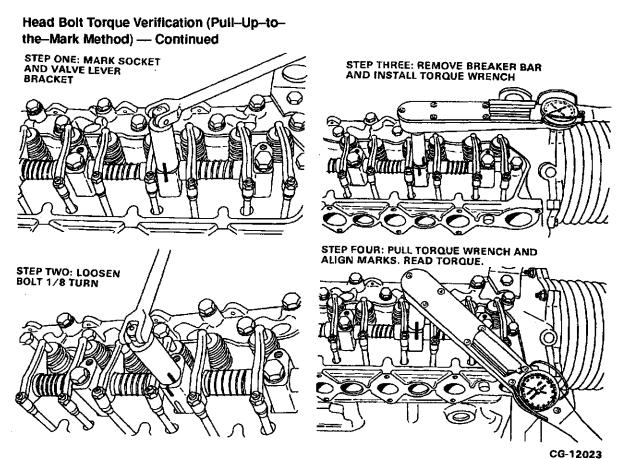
Checking Bolt Torque (Using Pull-Up-to-the-Mark Method)
